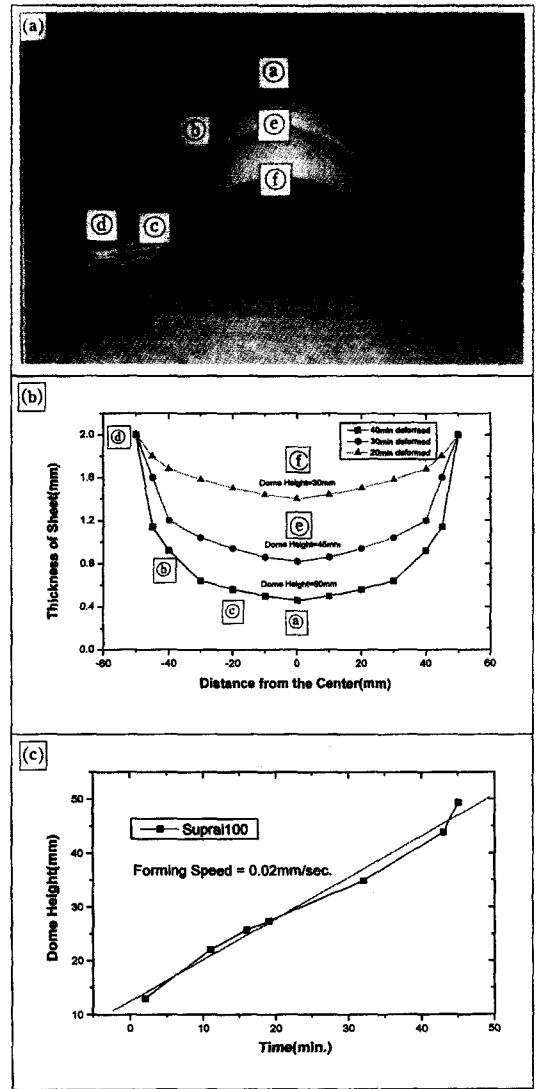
Appearance and thickness change of superplastic forming part using the as-received sheet
